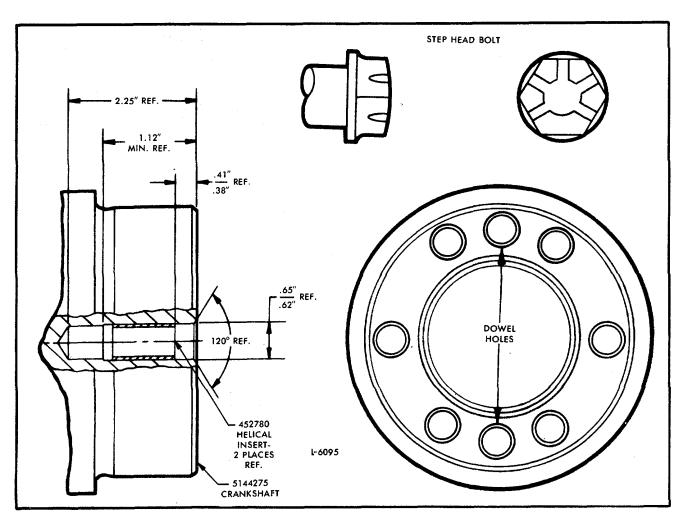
Reworking 8V-71 Crankshaft to 8 Holes
